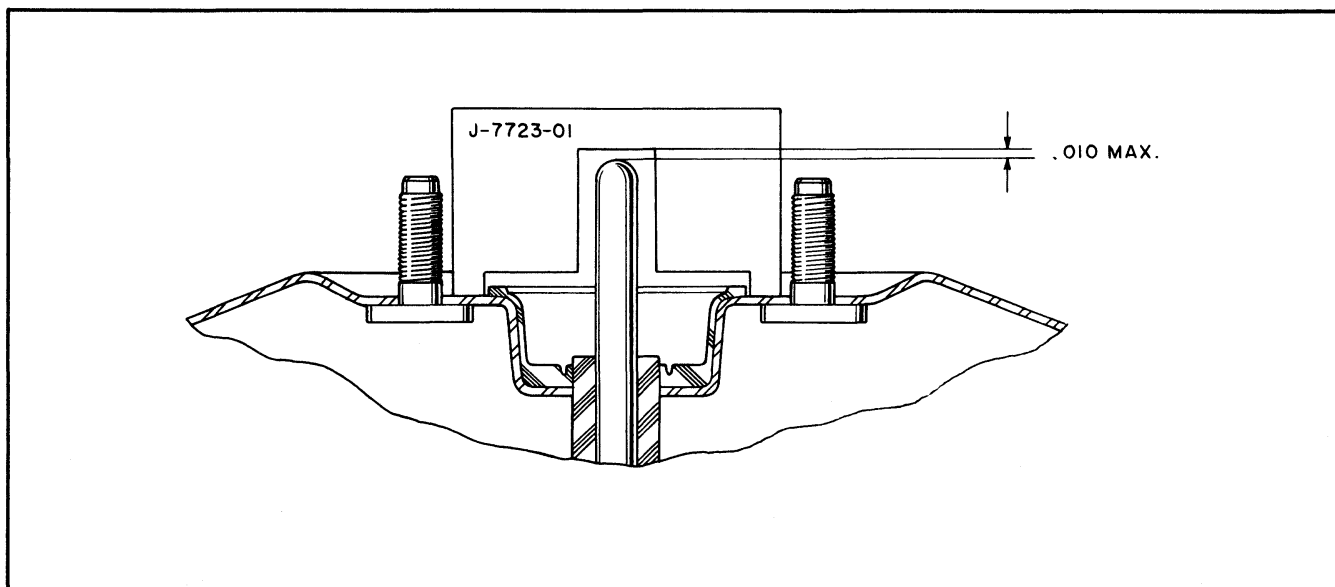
A-13 Checking Master Cylinder Push Rod Adjustment
